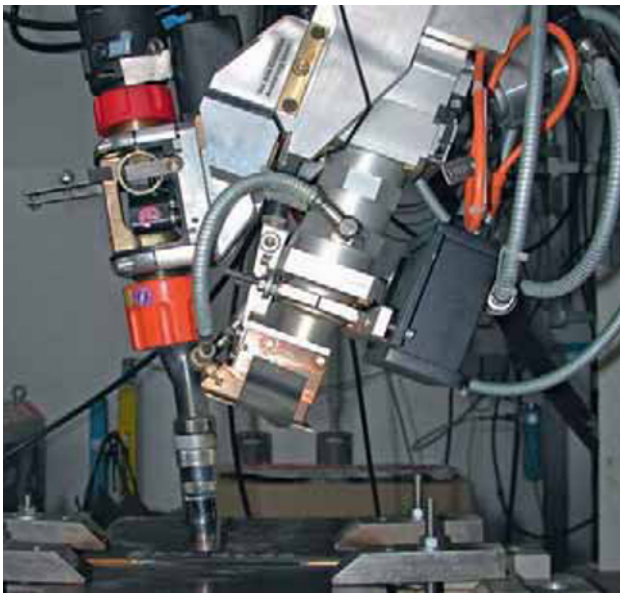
Hybrid welding head consisting of a 350 mm focal length (right) and a GMAW torch (left) used with 20 kW laser power
